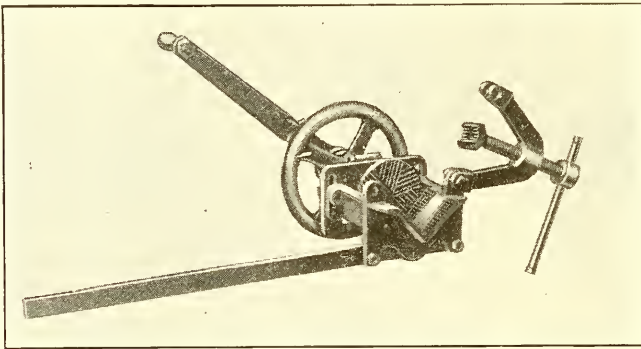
Pipe-Facing Machine Open to Receive Pipe.
